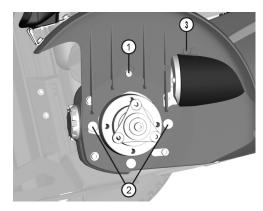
The front fender is fitted with one screw (1) and two fixing points (2) at the bottom. The wheelchair is shown without the drive wheel to get a better view of the front fender, the drive wheel does NOT need to be removed for this operation.
